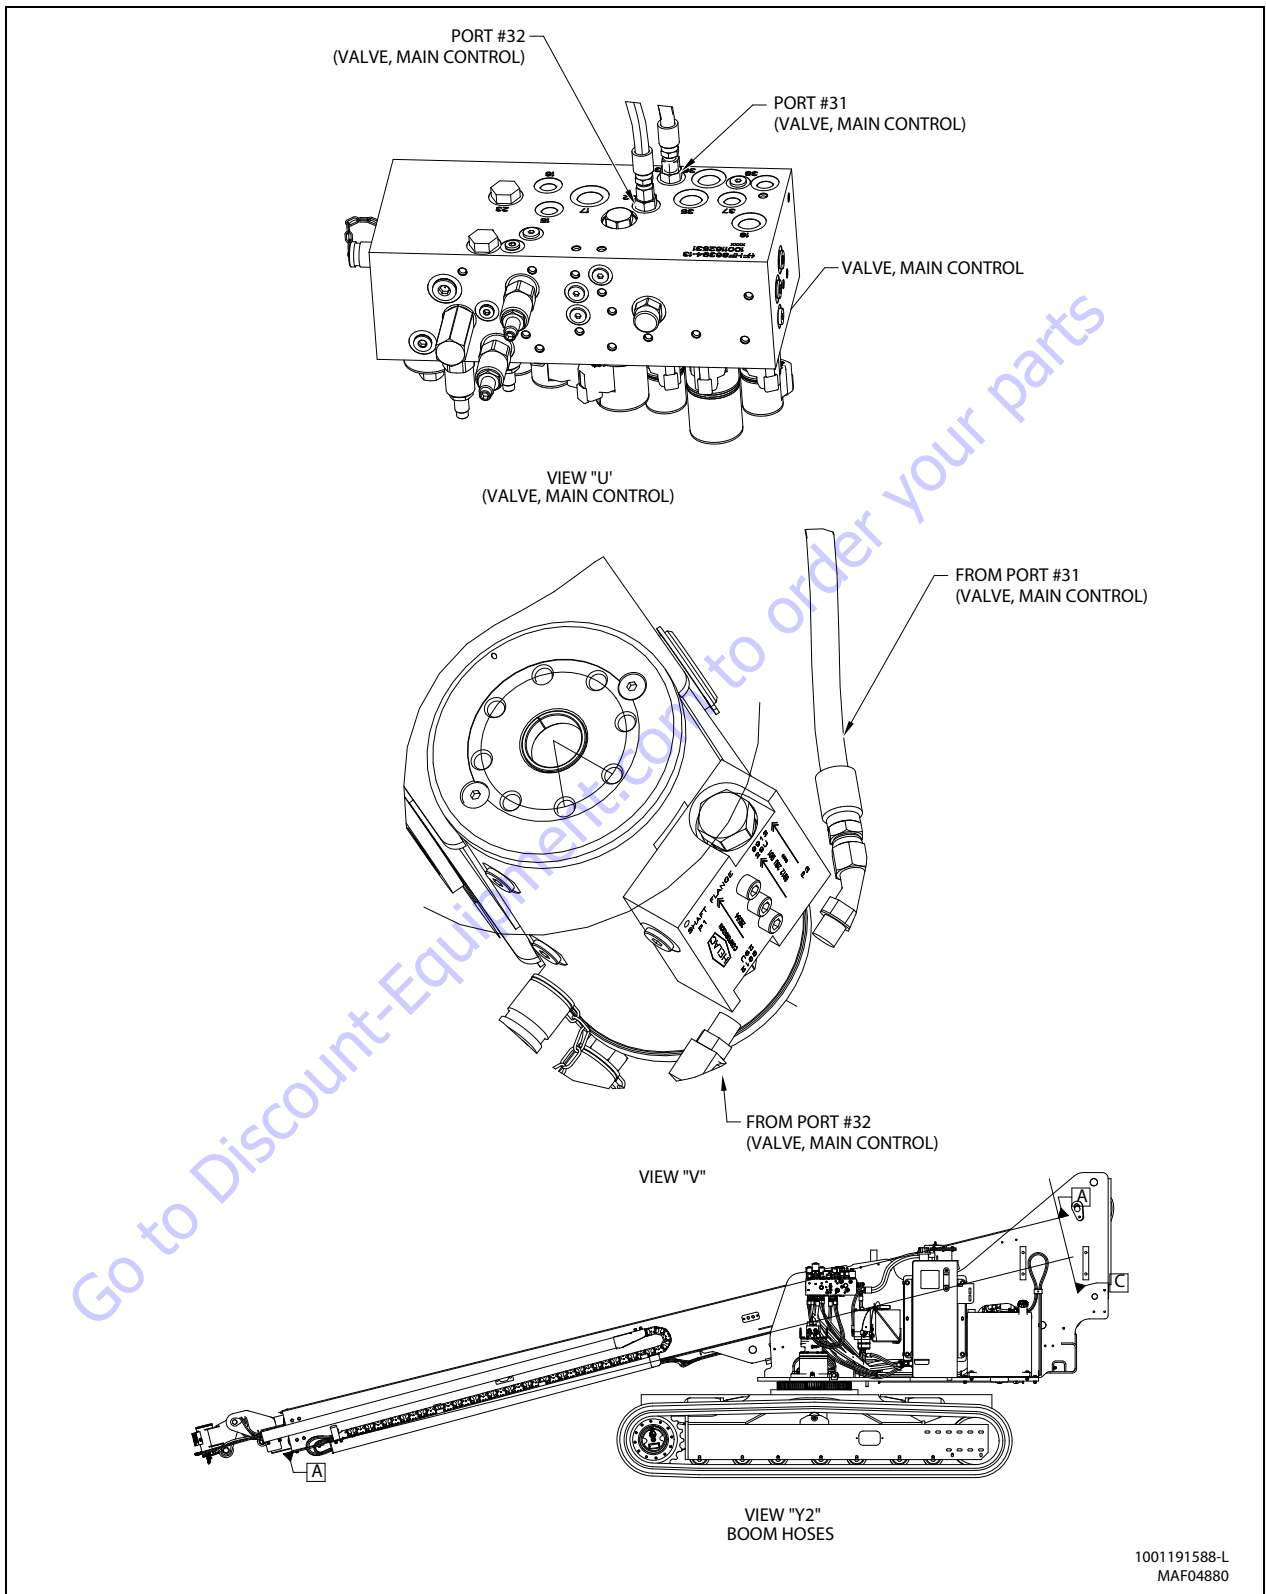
Hydraulic System Installation (400SC) - Sheet 14 of 16
